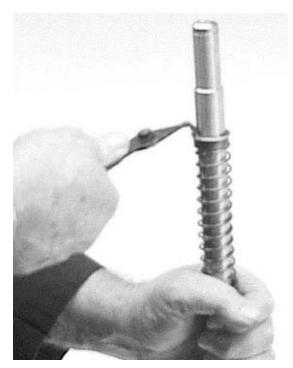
Remove Bias Spring Retaining Ring from Valve Stem.
